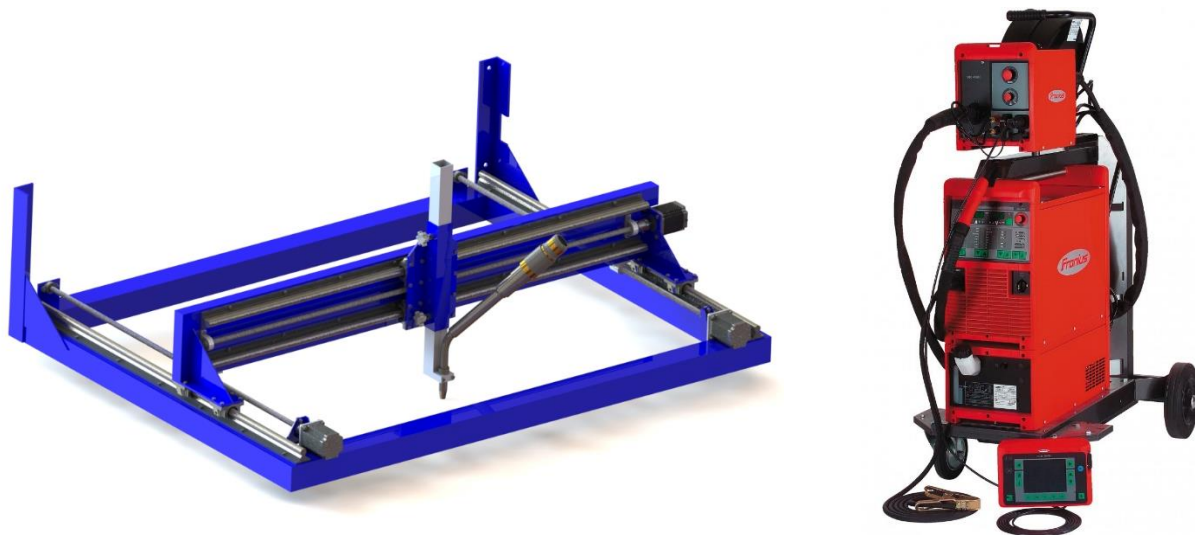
CNC Welding Table and Power Source TransSynergic 4000
